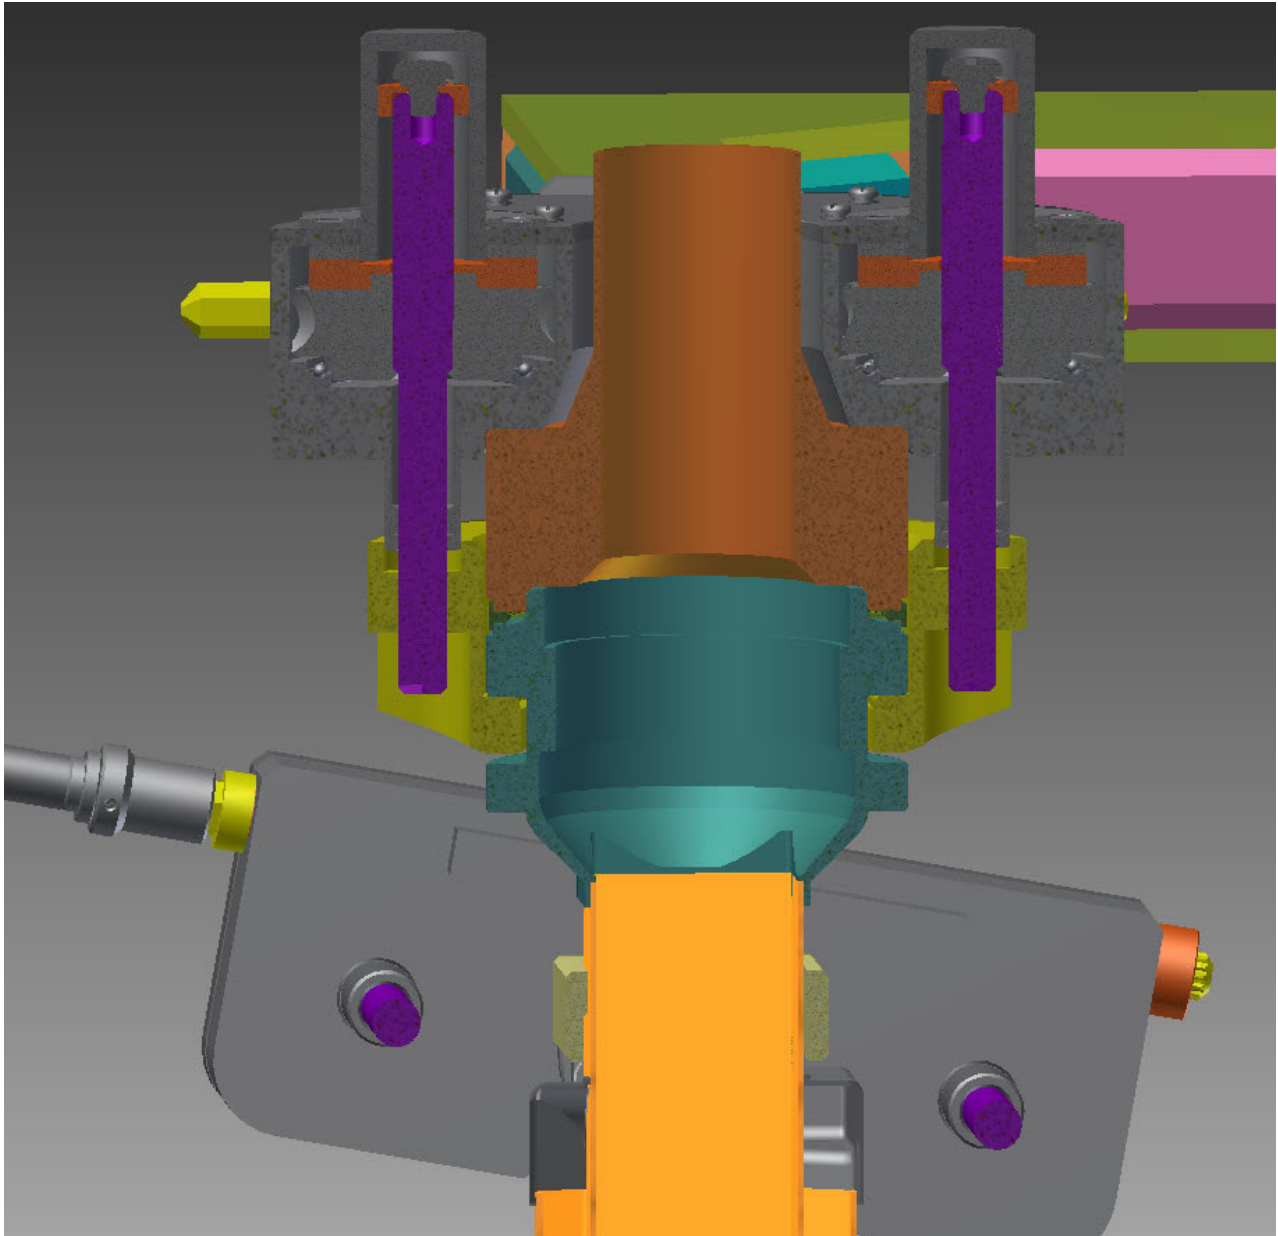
Section is taken through the top of the target assembly and the vacuum clamp assembly.
